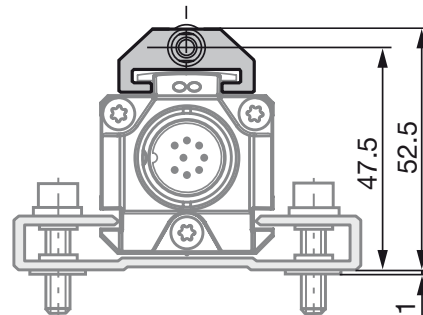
Dimensions and distances with BTL5-T-2814-1S magnet
